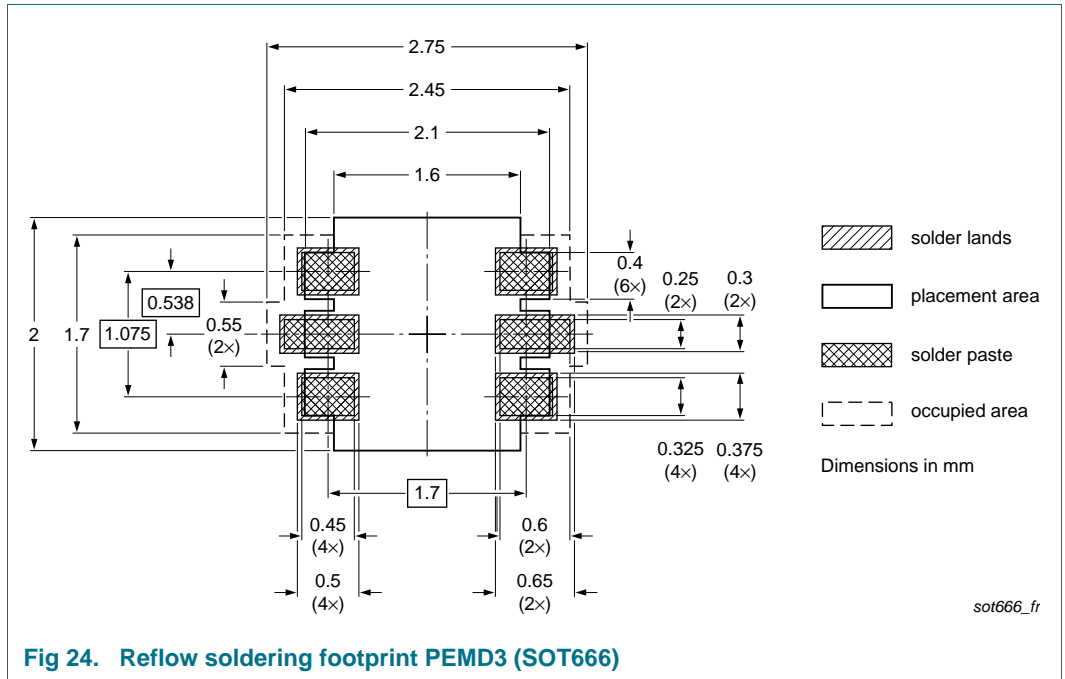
Reflow soldering footprint PEMD3 (SOT666)
